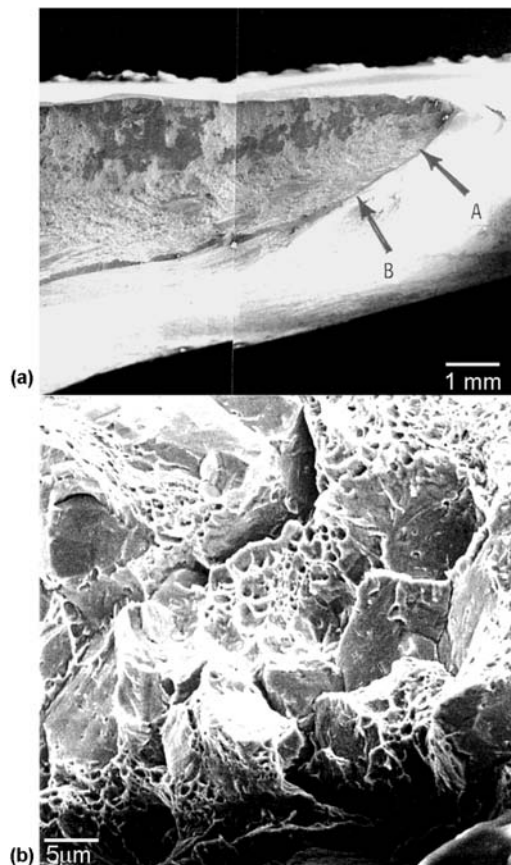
SEM fractographs showing (a) location of origin at the inner fillet radius and (b) quasi-cleavage evident on the fracture surface
